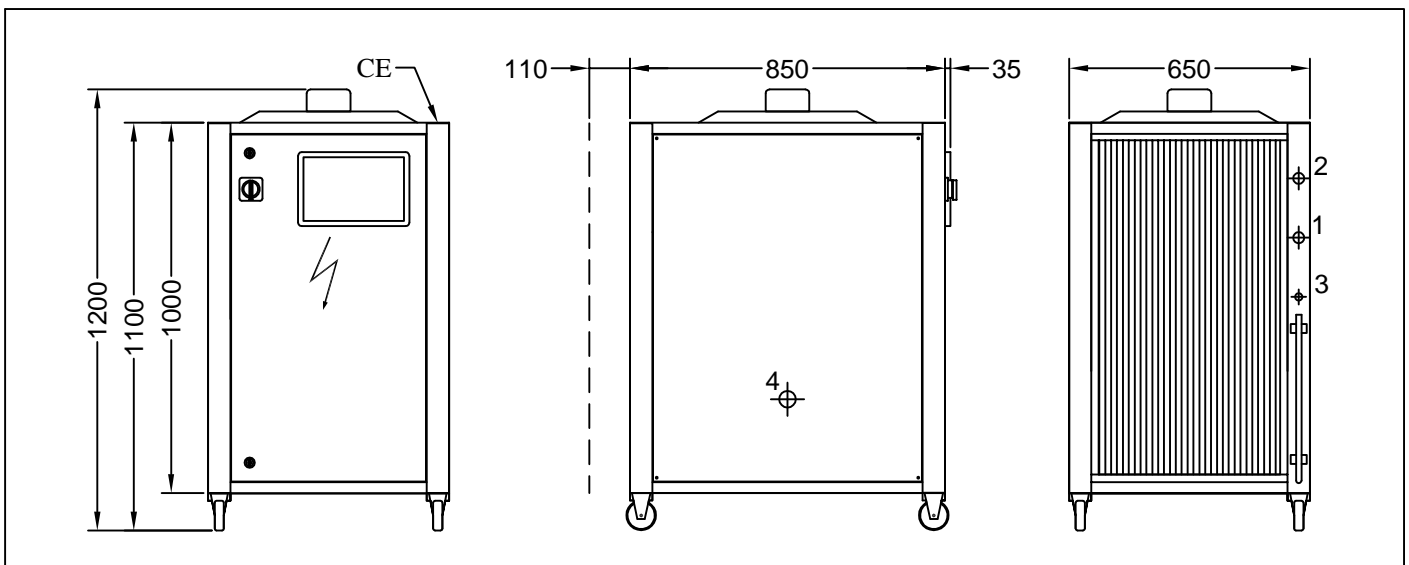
Dimensions of the Multi Rod Feeding System with the Extended Tube Container [mm]
